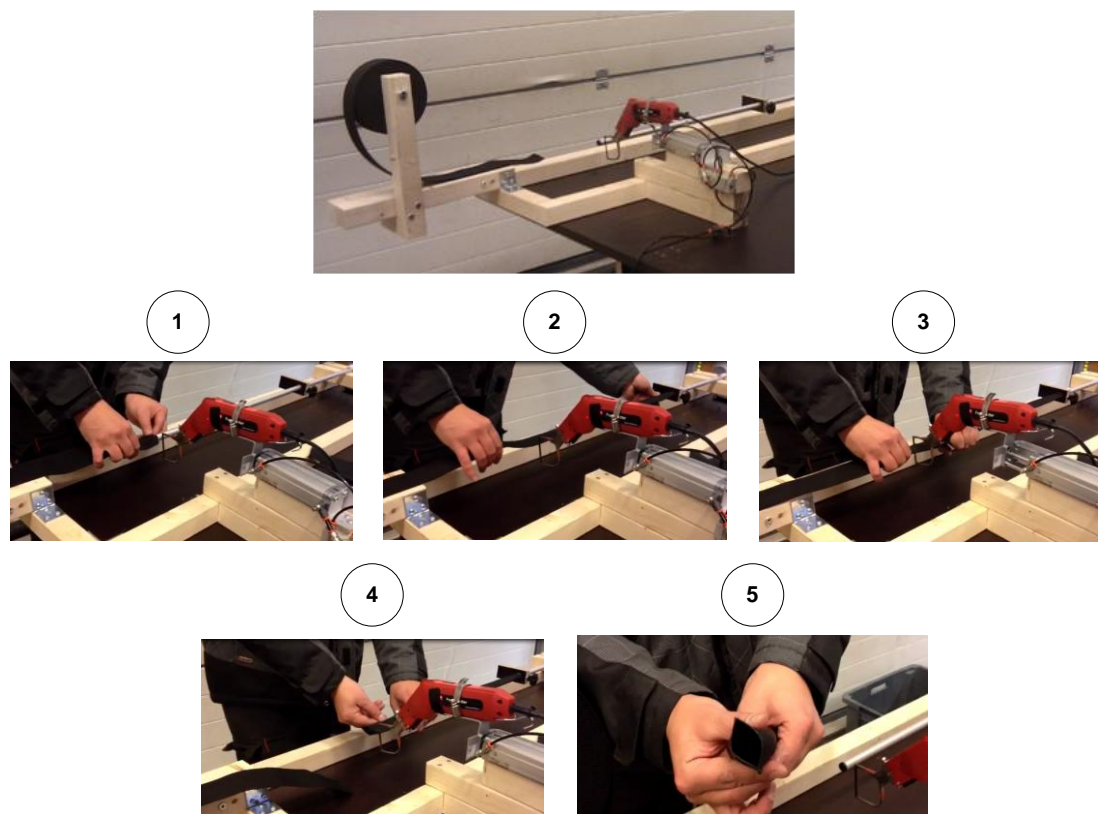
Designing a sleeve measuring system for the mock-up.
